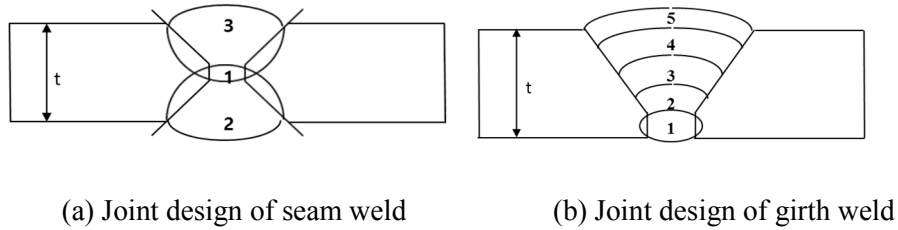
Joint design of seam and girth welds of API X70 pipe.
